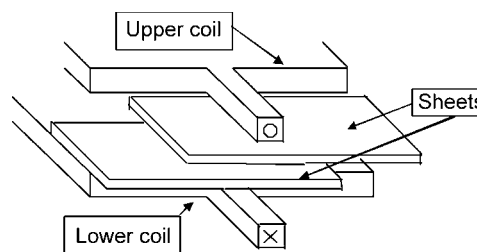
Magnetic pulse welding of flat sheets. Source: Ref 34
